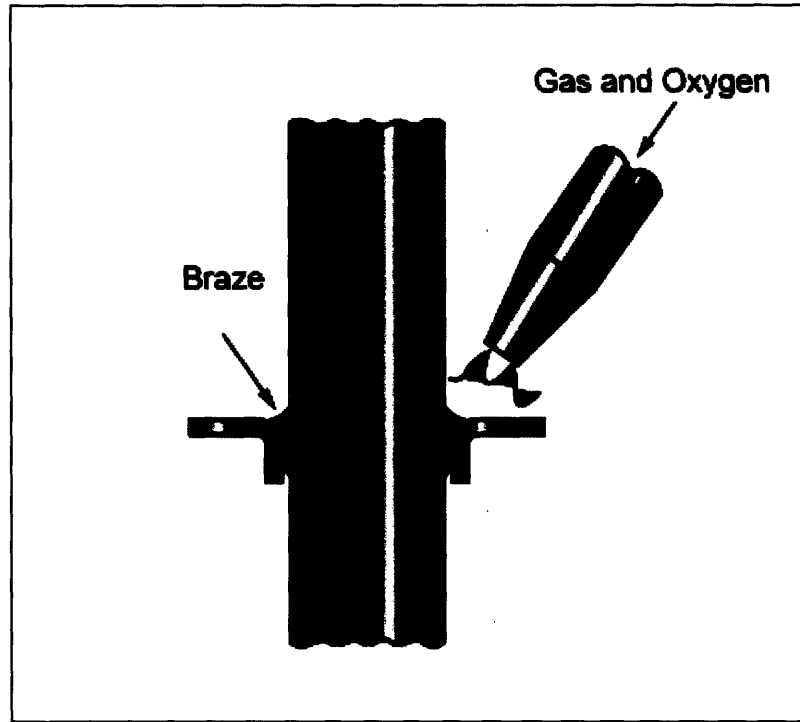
Oxyacetylene welding process schematic [48]
